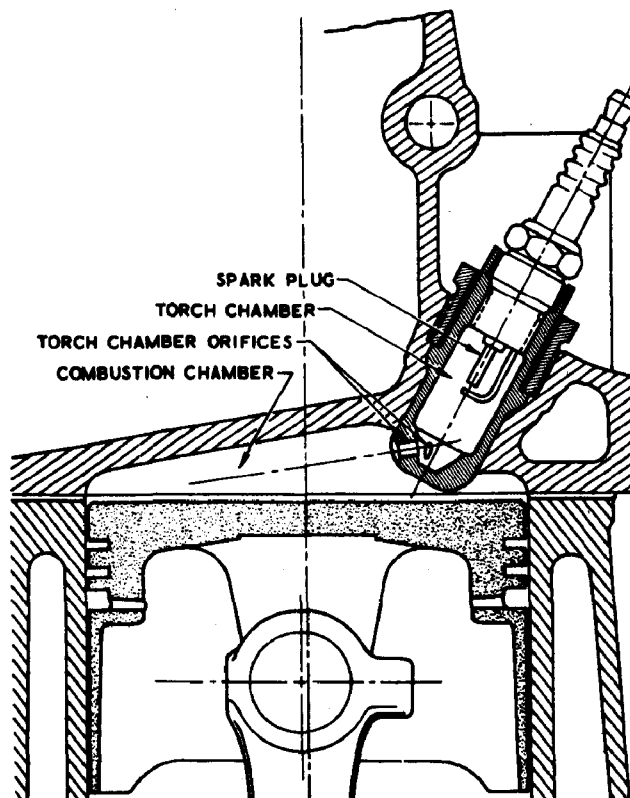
Ford torch ignition engine (Ref. 4-1)
